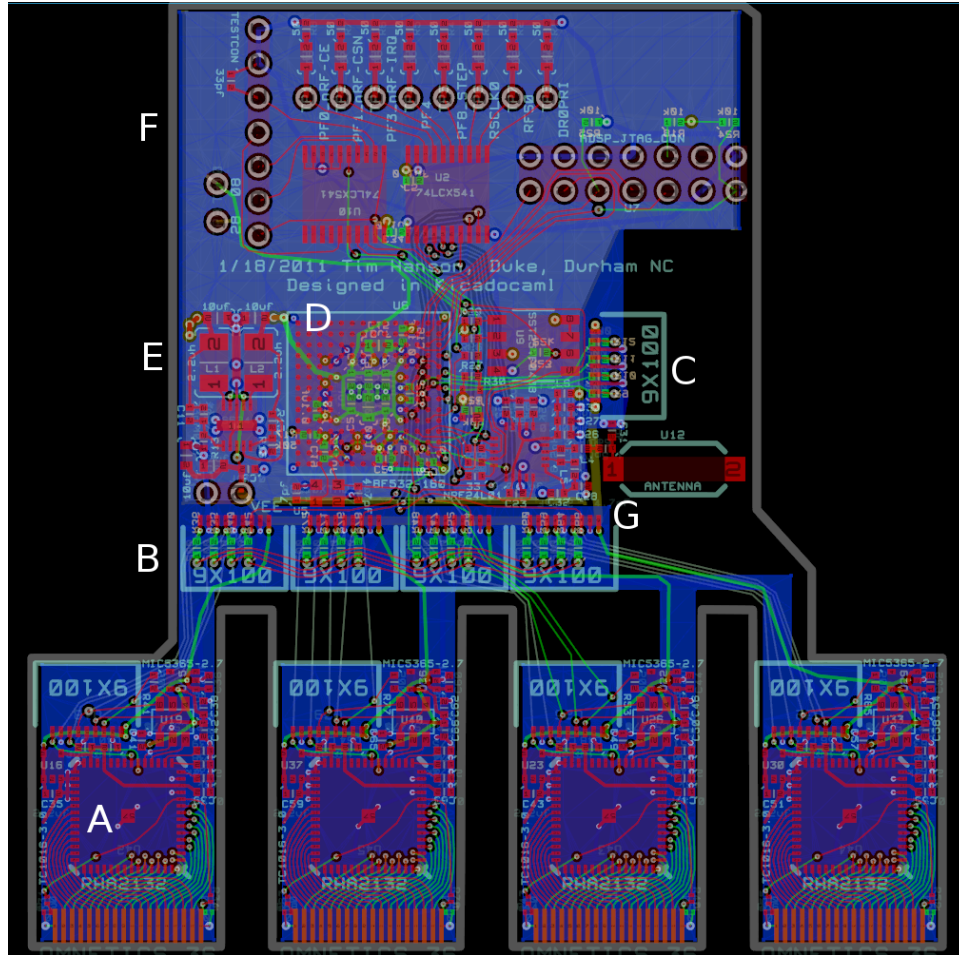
Revision 6 full 128 channel wireless PCB. A, Digitizing headstage using one Intan RHA2132 and a ADCS7476 ADC. Parts were mounted only on one side of board to permit stacking on tightly-arrayed electrode connectors. These connect to the processor through 9-pin (extra pins so that if orientation is wrong, nothing breaks) Omnetics nanominiature connectors, B, which were quite difficult to source and should be replaced. C, Connector for high-speed serial interface for wired use. D, Blackfin processor, here clocked at 400 Mhz at 0.95V. E, Buck power supply, properly integrated into headstage as opposed to the battery. F, Debug circuitry: JTAG and FLASH headers. G, Ground plane cut to avoid ground transients from interfering with digitizing headstages. Dimensions: Digitizing headstage, 1.37 x 2.15 x 0.16 cm, Processor and wireless, 4.3 x 2.1 x 0.34 cm. Fabricated on 0.68 mm thick, high T_g FR4, 6 layers.
